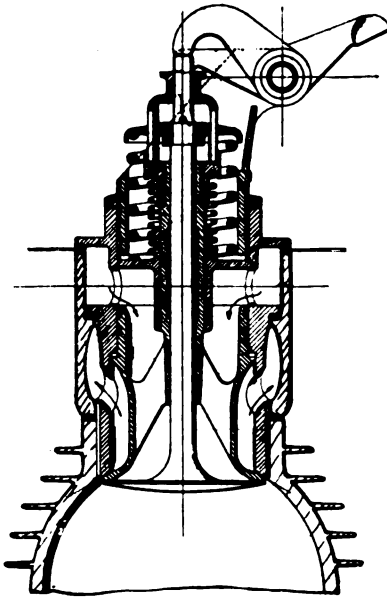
“Pipe” Engine. Valve Arrangement.
